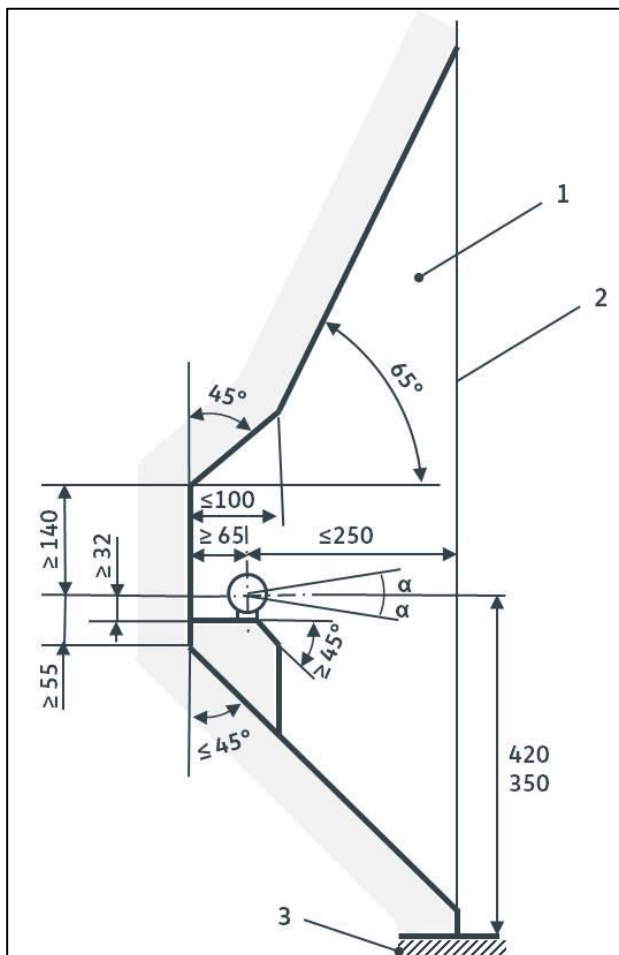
Clearance and height of the coupling ball as per UNECE R 55 (side view)
